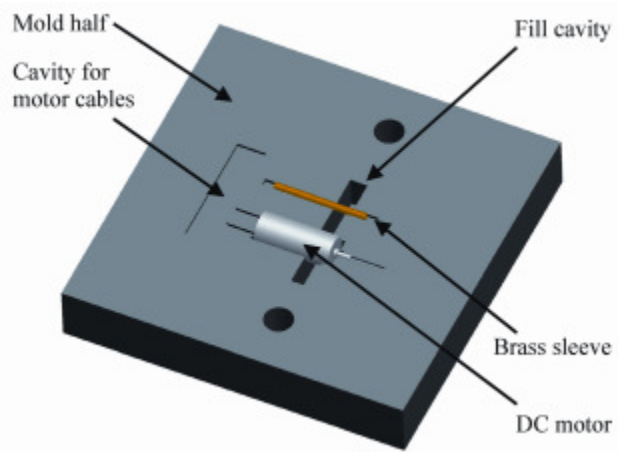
In-mold assembly setup for manufacturing the motor holder
